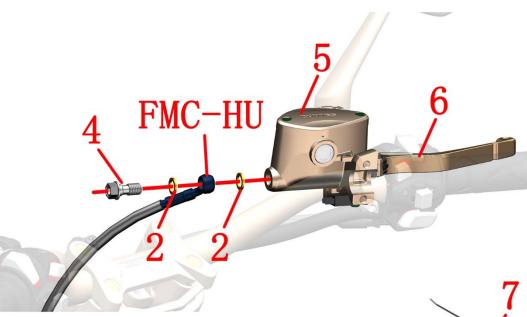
FRONT FORK COMPONENT		ABS brake system-A 2	CHK	40)
